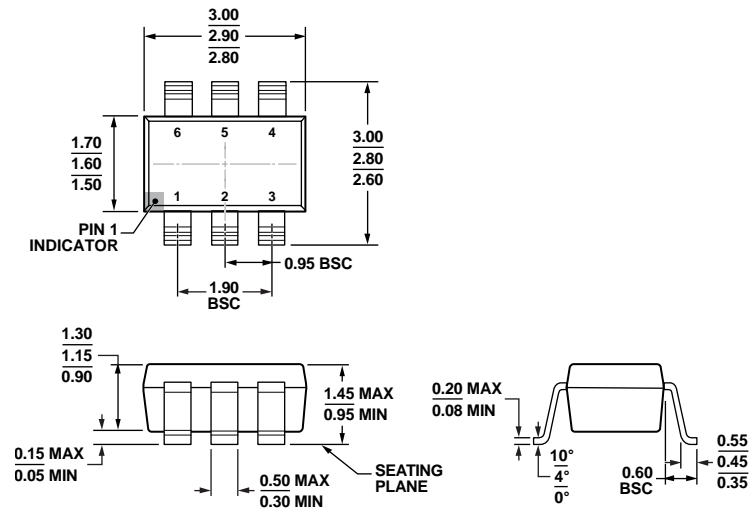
6-Lead Small Outline Transistor Package [SOT-23]
